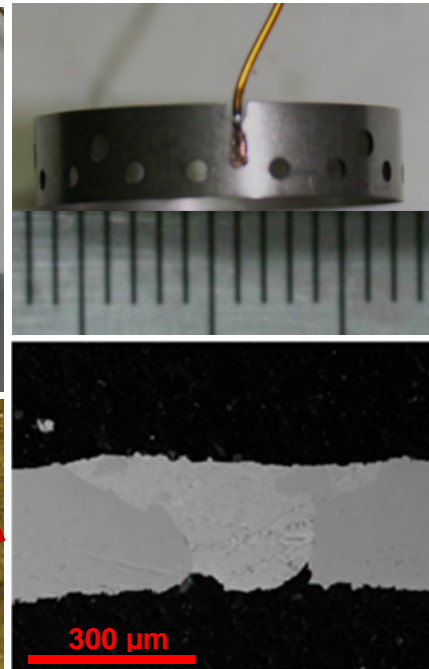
Silver-coated copper wire welded to stainless steel ring
